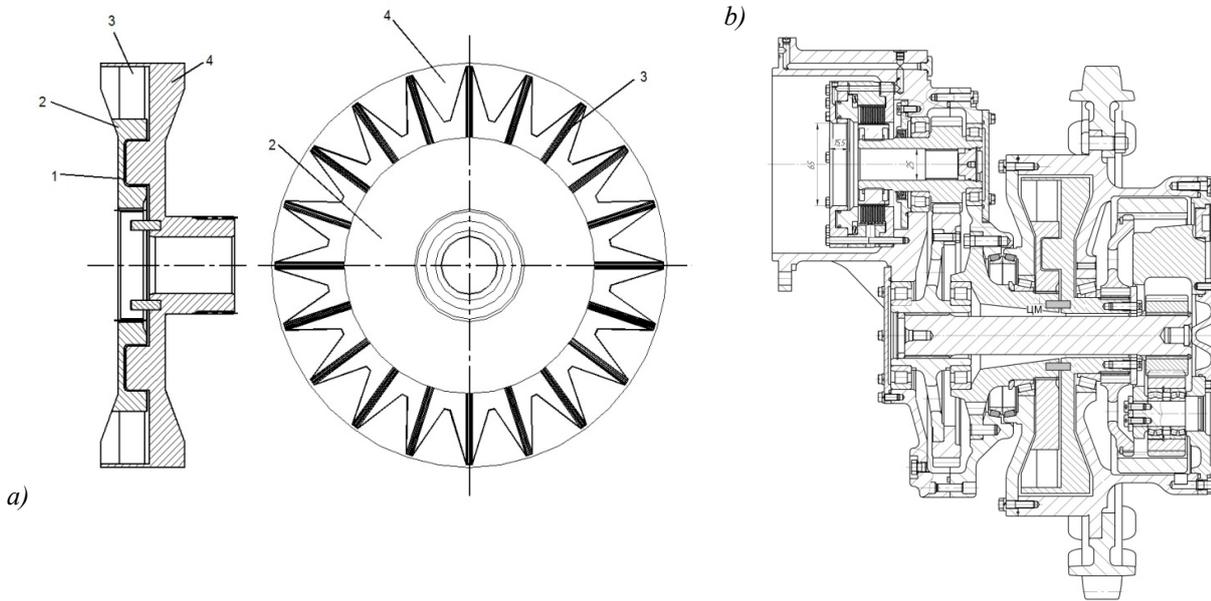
a – elastic coupling construction; b – final drive unit with installed coupling
